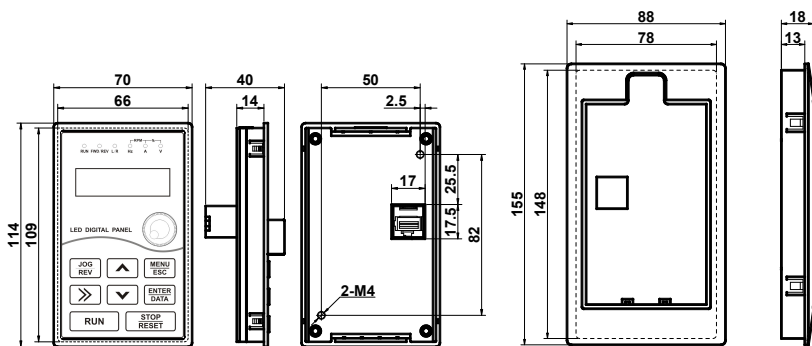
Schematic Diagram for Physical Dimensions and Mounting Dimensions (up 250 kW)
